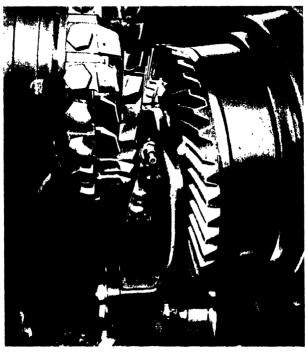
Cutter, Gear and Chamfering Arm on Gleason No. 22
